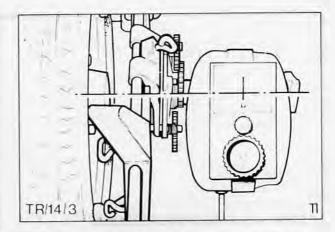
When fitting equipment ensure projector spindle is in line with wheel centre
